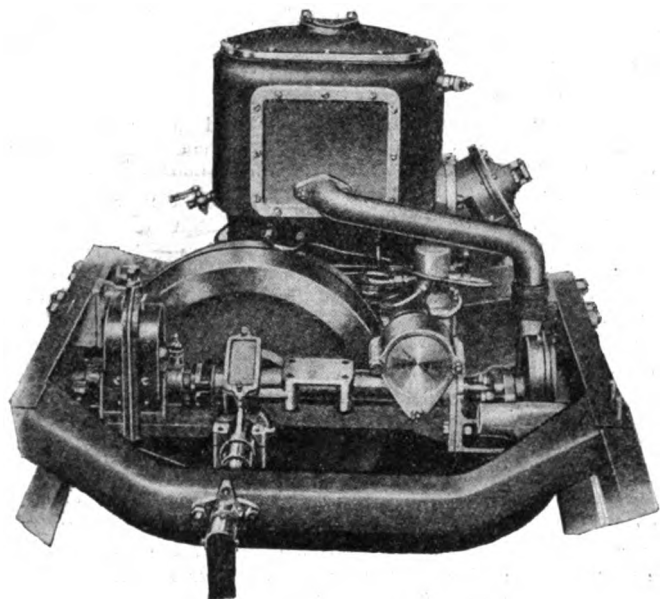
Front View of Chassis of "Valveless" Car, showing the two-cycle engine and the cross-shaft actuating the magneto, the oil pump and the water-circulating pump.
